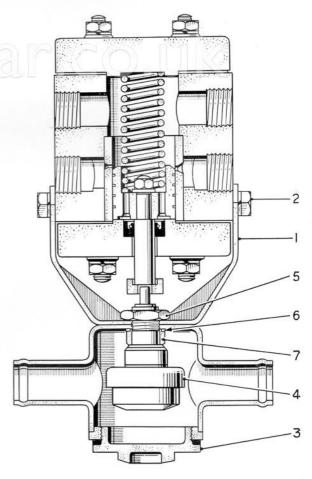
SECTION THROUGH THERMOSTAT CONTROLLER
